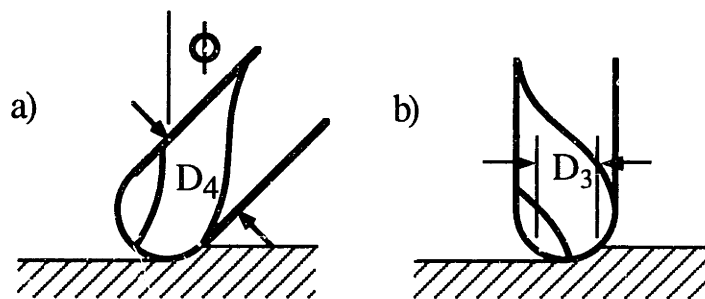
Machined surface profiles for a) conventional endmill and b) ball endmill
